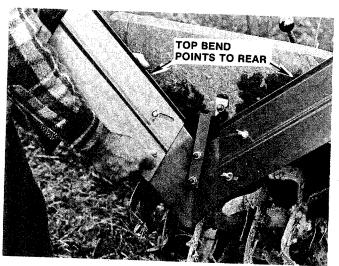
/49) Large carriage bolts go through blade first, then bracket.
